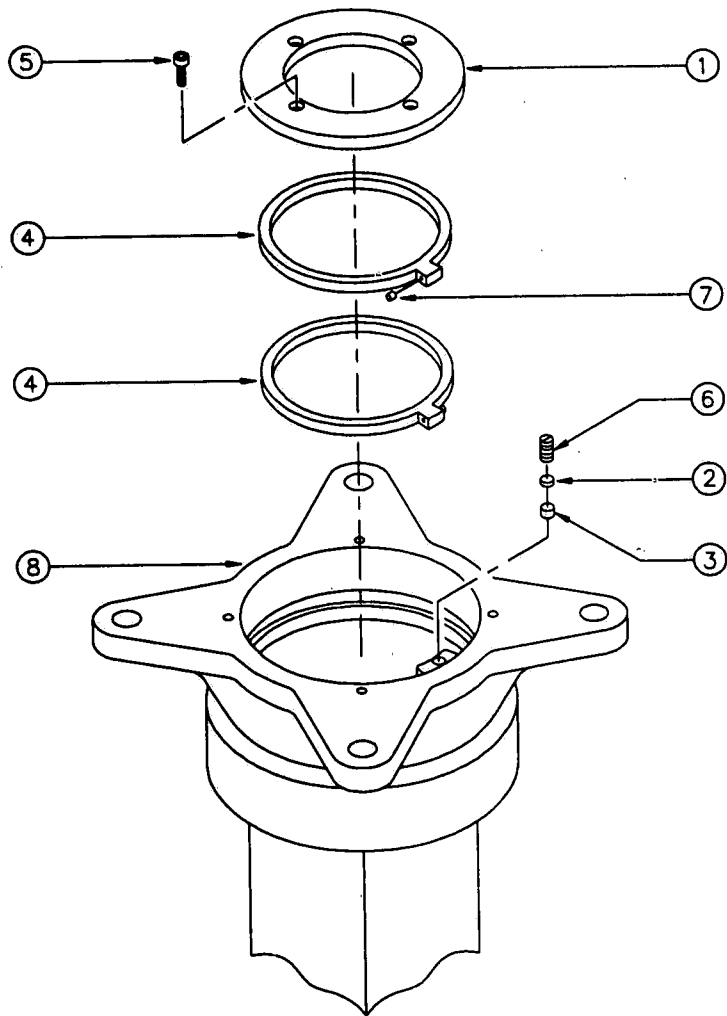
Rotational Stop and Friction Brake Assembly, Medium Weight — Model 130M
